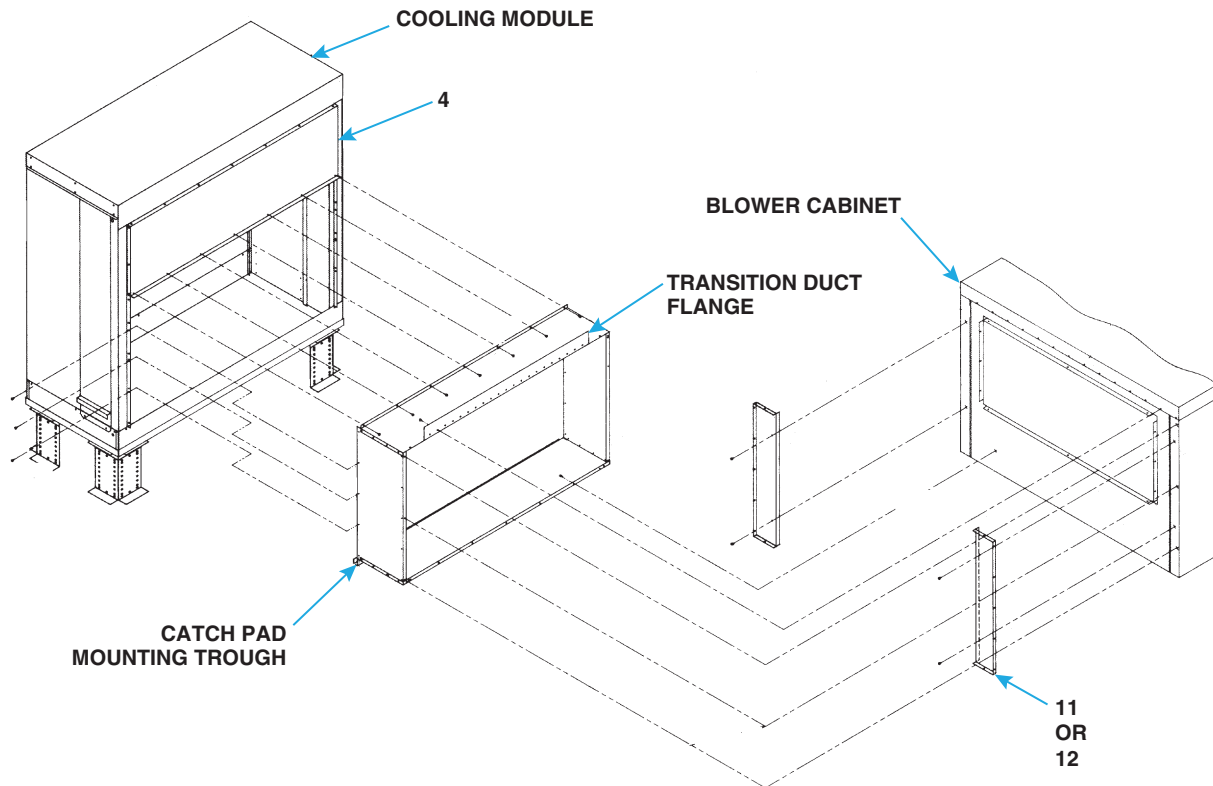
Evaporative Cooling Module, Transition Duct, and Blower Cabinet (Refer to [Table 1](#))
